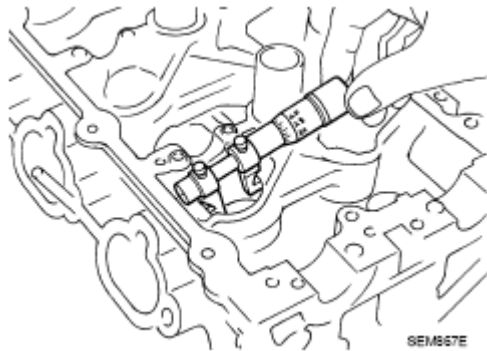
Measuring Inner Diameter Of Valve Lifter Hole Of Cylinder Head
